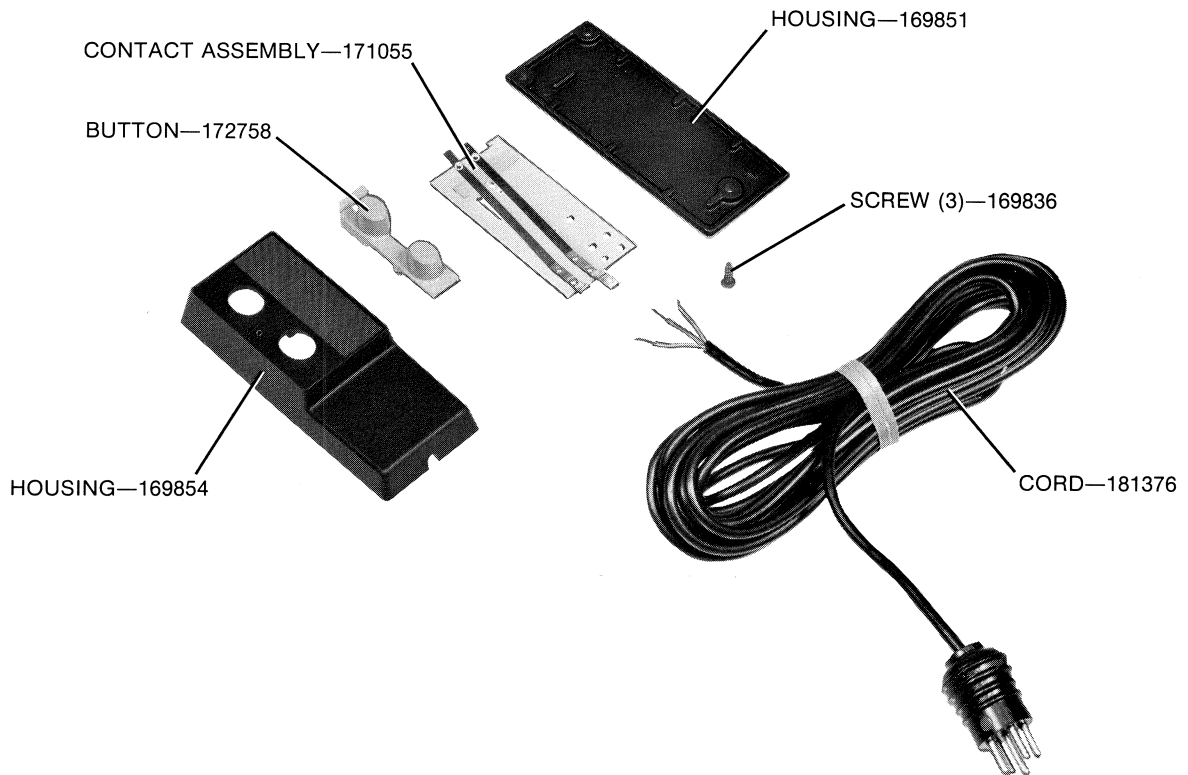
REMOTE CONTROL ASSEMBLY (650, 650H, 650H-K, and 700 PROJECTORS)
